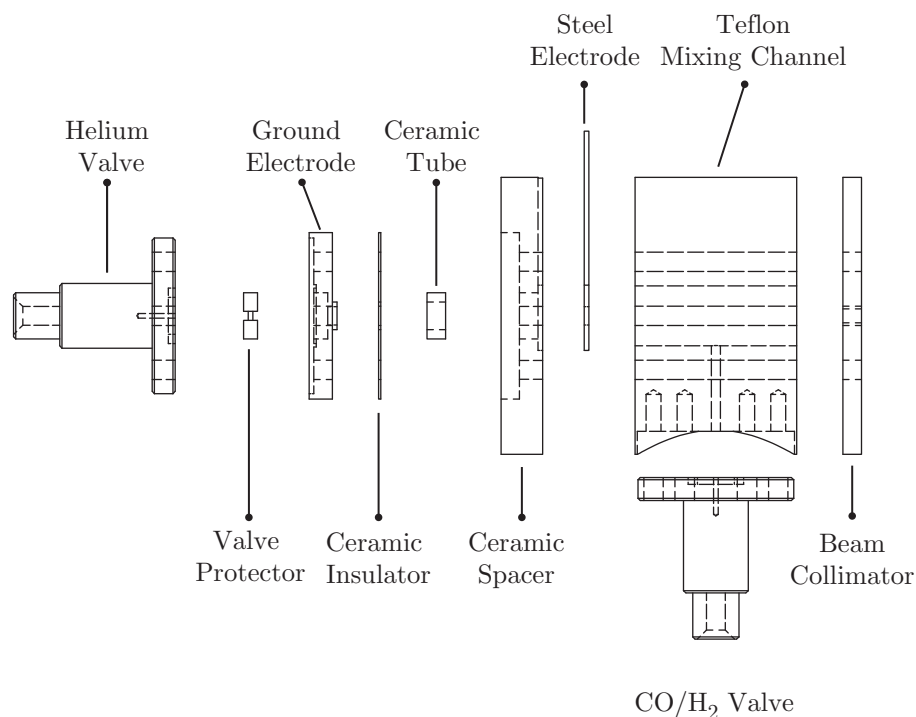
An exploded view of the apparatus used to test the discharge-reaction source.
